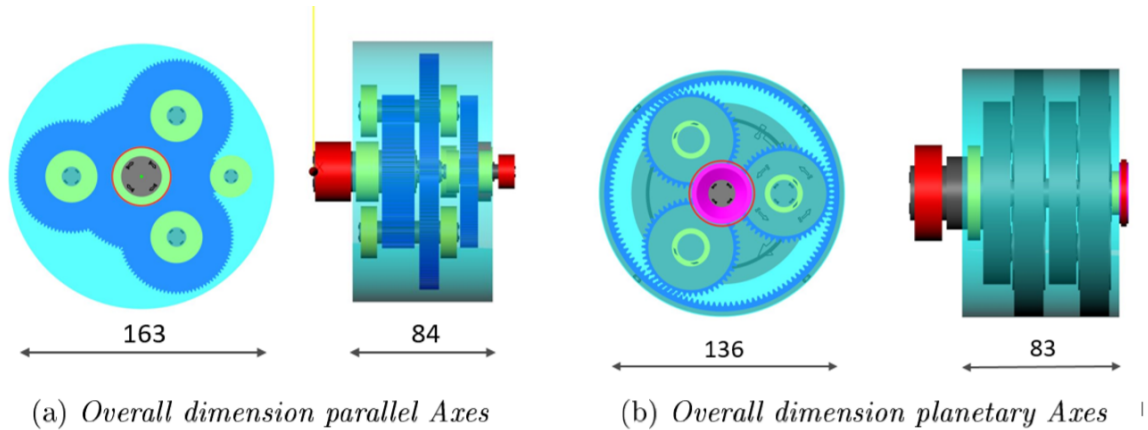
preliminary gearbox design: the two proposed configurations [15]
